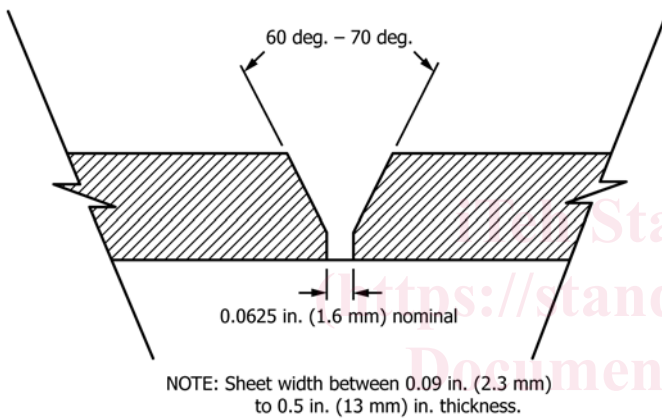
Typical Bevel Profile (Sheet >0.090 to 0.5 in. (2.3 mm to 13 mm) in Thickness)
